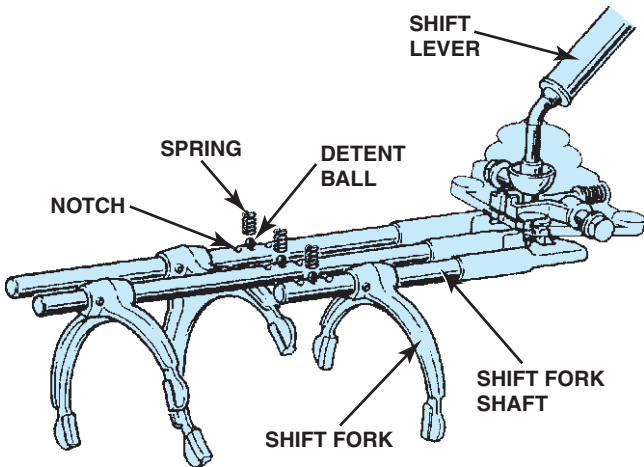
The detent notches in the shift shafts are designed to hold the shift shaft in one of the three positions. (Courtesy of DaimlerChrysler Corporation)
